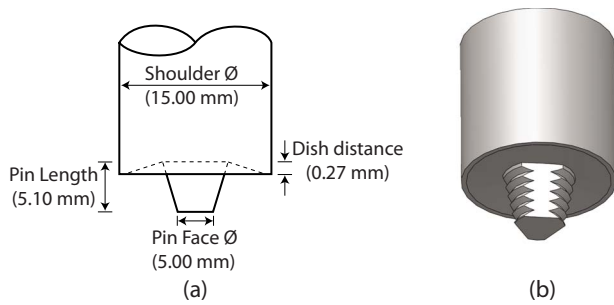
Schematic of (a) key tool dimensions used and (b) rendering of tool used
